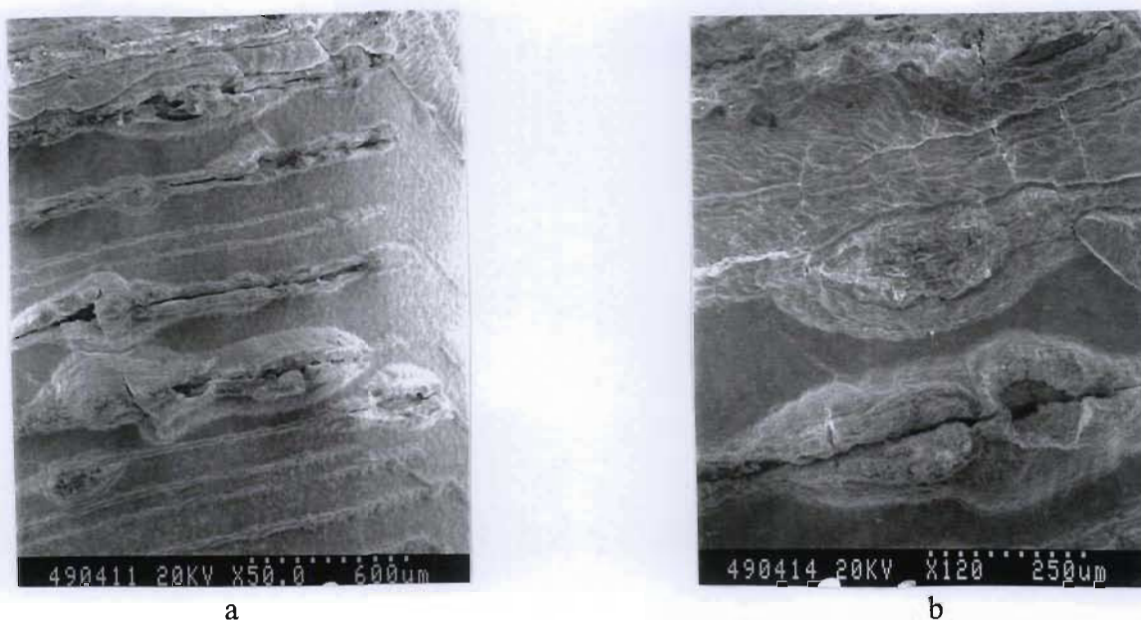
Fractography showing cracking of the coating close to the fracture surface in the 2µm platinum aluminide coating after HTLCF in Ar + 5% SO₂ (S.R. 0.38%)
